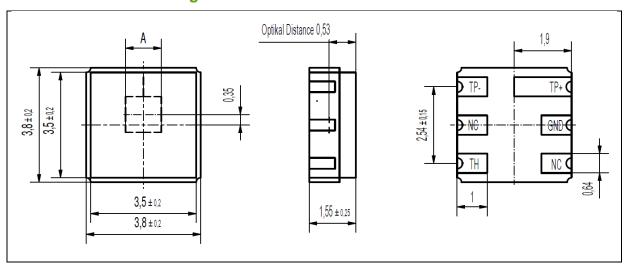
Mechanical drawing of detector TPiD 1S 0622
